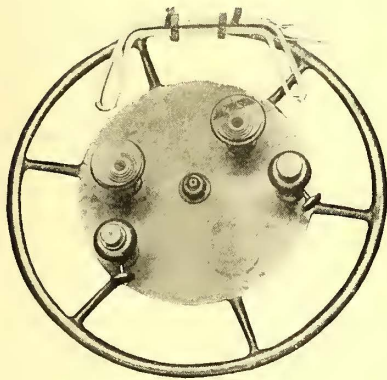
FORM FOR WINDING G. E. 800 ARMATURE COILS
